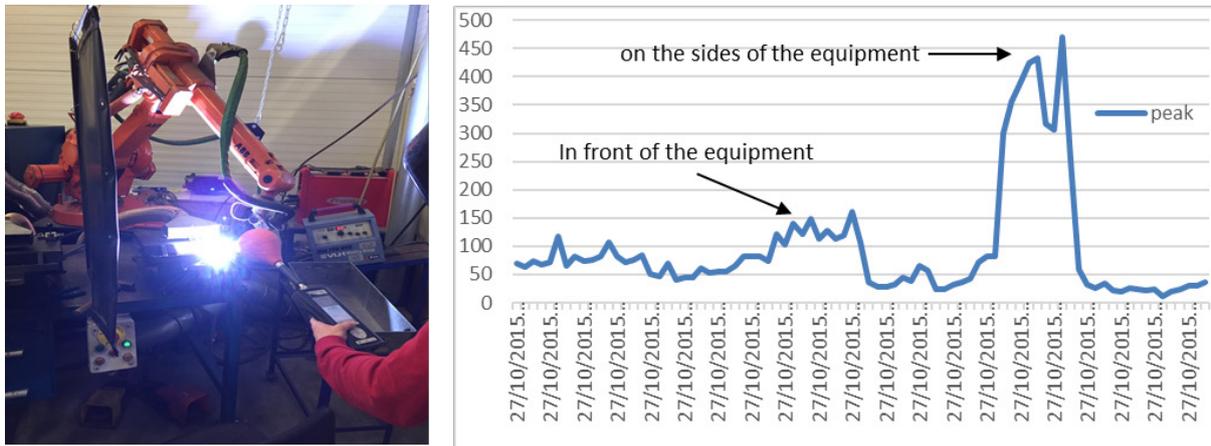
(a) Medium frequency resistance welding machine (b) Measurement positions of the welding machine
